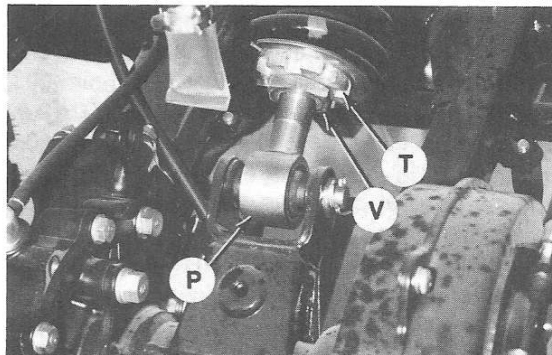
Shock absorber spring preload is adjusted by turning nut (T). Refer to text for adjustment.
